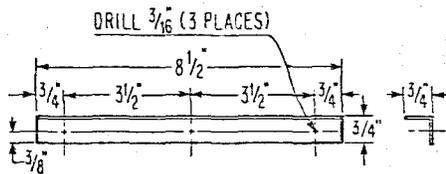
CORRUGATED FILTER SUB-ASSEMBLY DETAIL
